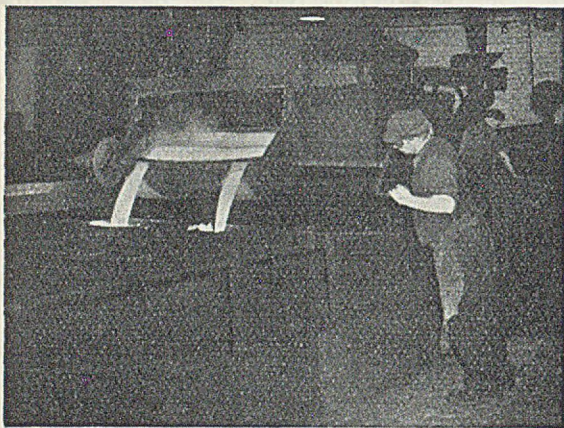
Casting a Bath Mould from a Trough-type Ladle with a Double Spout.
